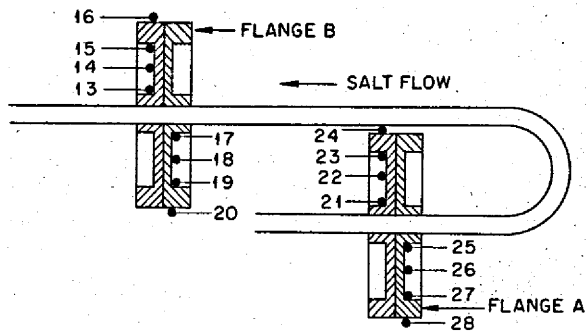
Locations of Thermocouples on Freeze-Flange Joints.
